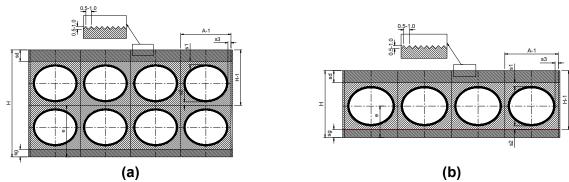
Characteristics of the Pipe wall sections, a. Double Layer Profile Wall section, b. Single Layer Profile Wall section
